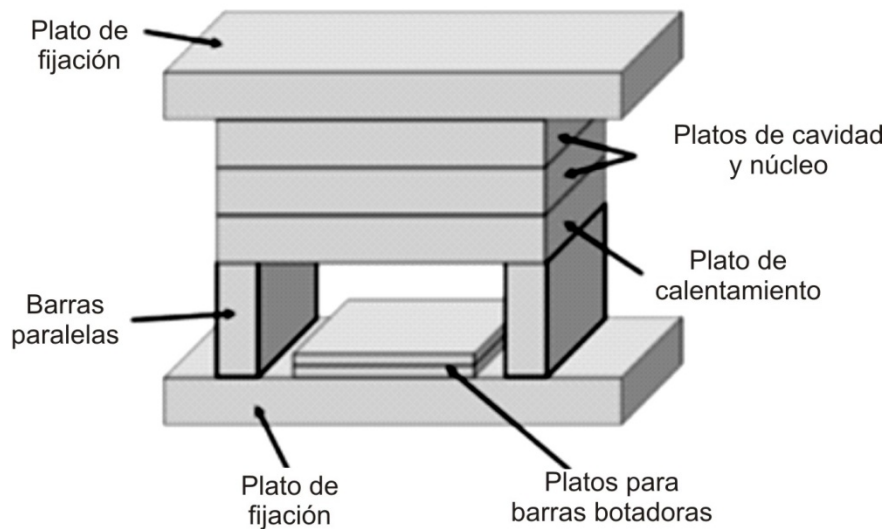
Schematic of a prefabricated mold, which only lacks the cavity for the desired part.
